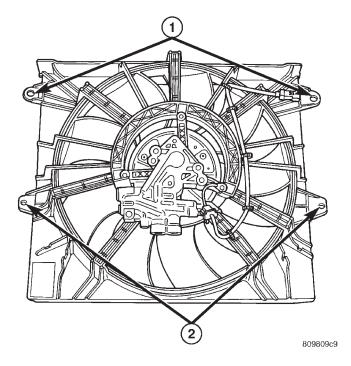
FAN SHROUD MOUNTING BOLT LOCATIONS
